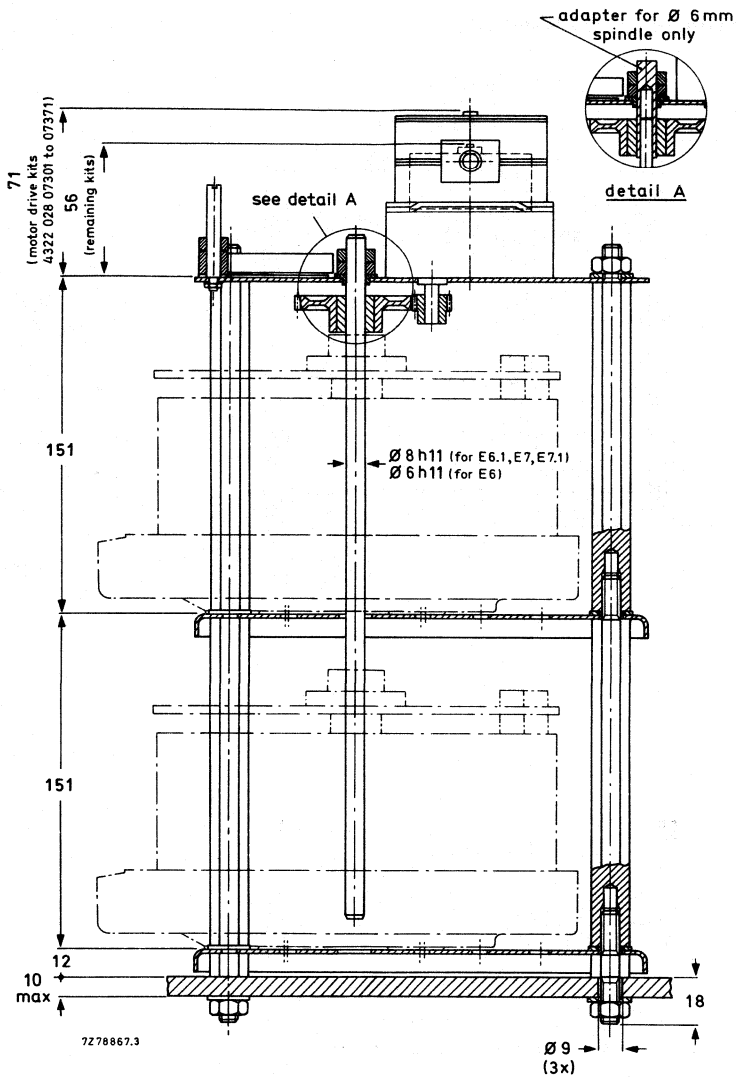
Motor drive for two ganged transformers with size code E6, E6.1, E7 and E7.1.
